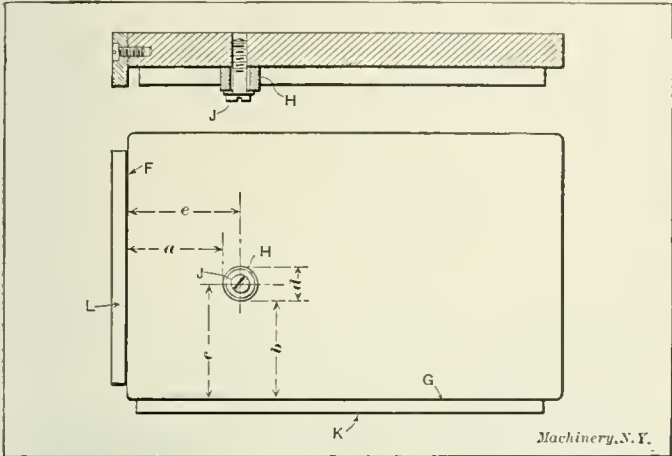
Locating Holes in Master Plate with Gage Strips and Buttons
